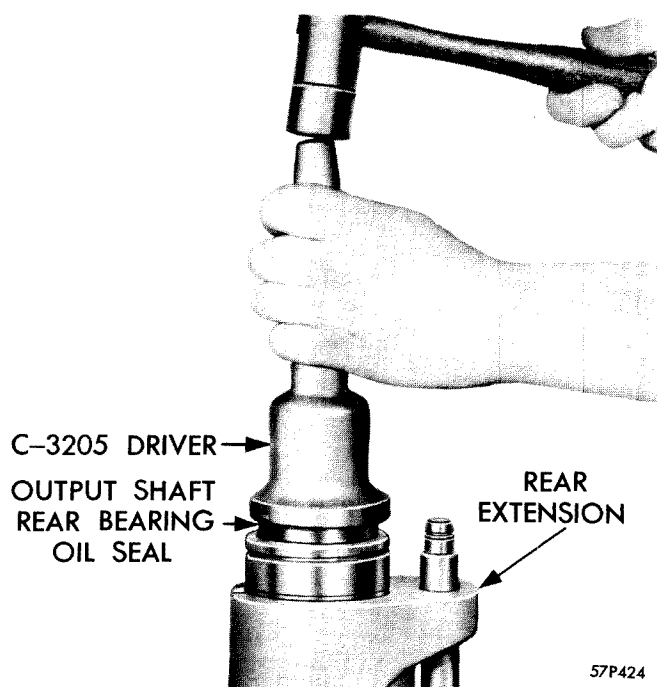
Installing Output Shaft Rear Bearing Oil Seal
